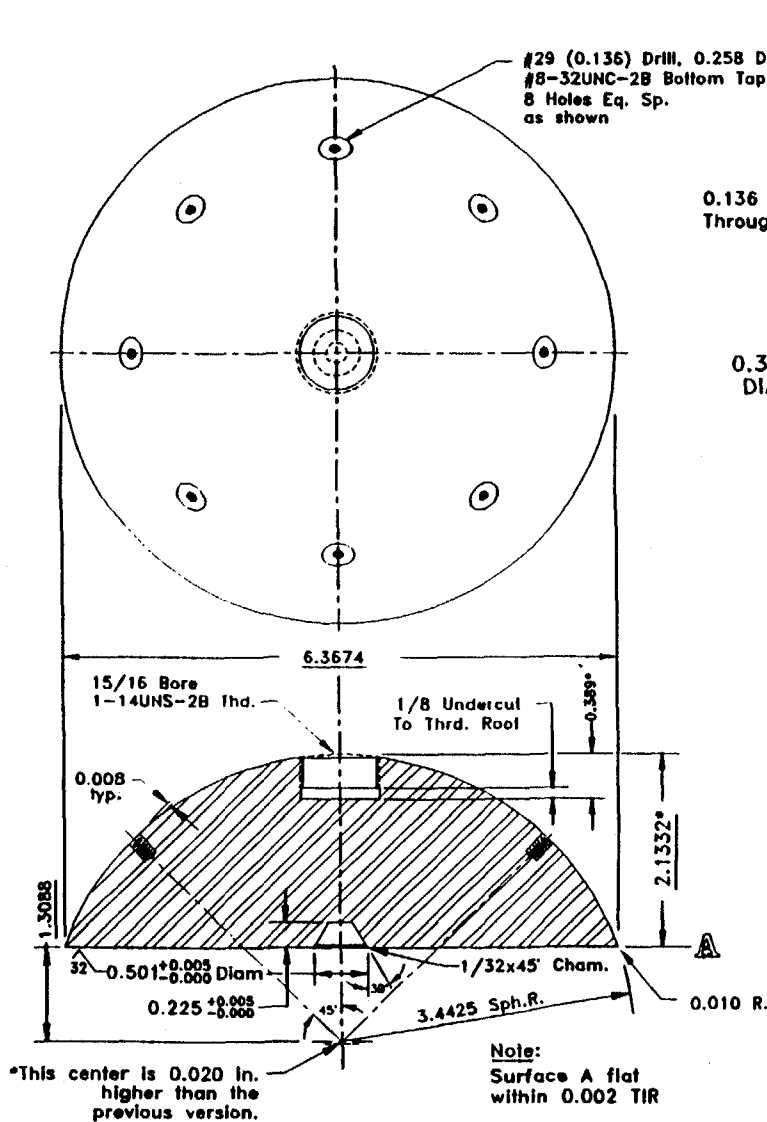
Upper polar cap—nominal radius, 3.4425 in.; material, oralloy.
